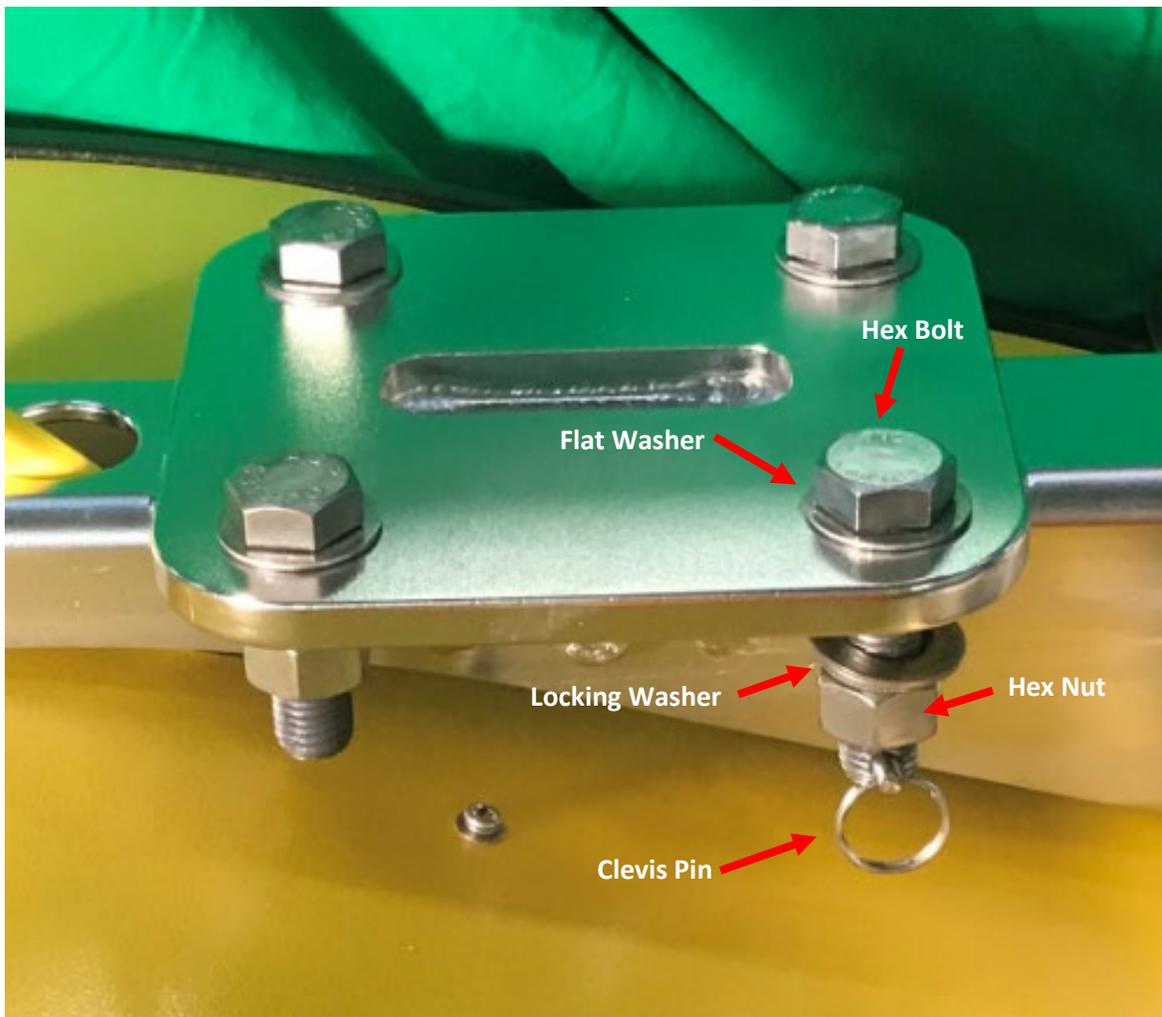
Towfish Mounting Flange to Pole Mount Flange Bolt Assembly
